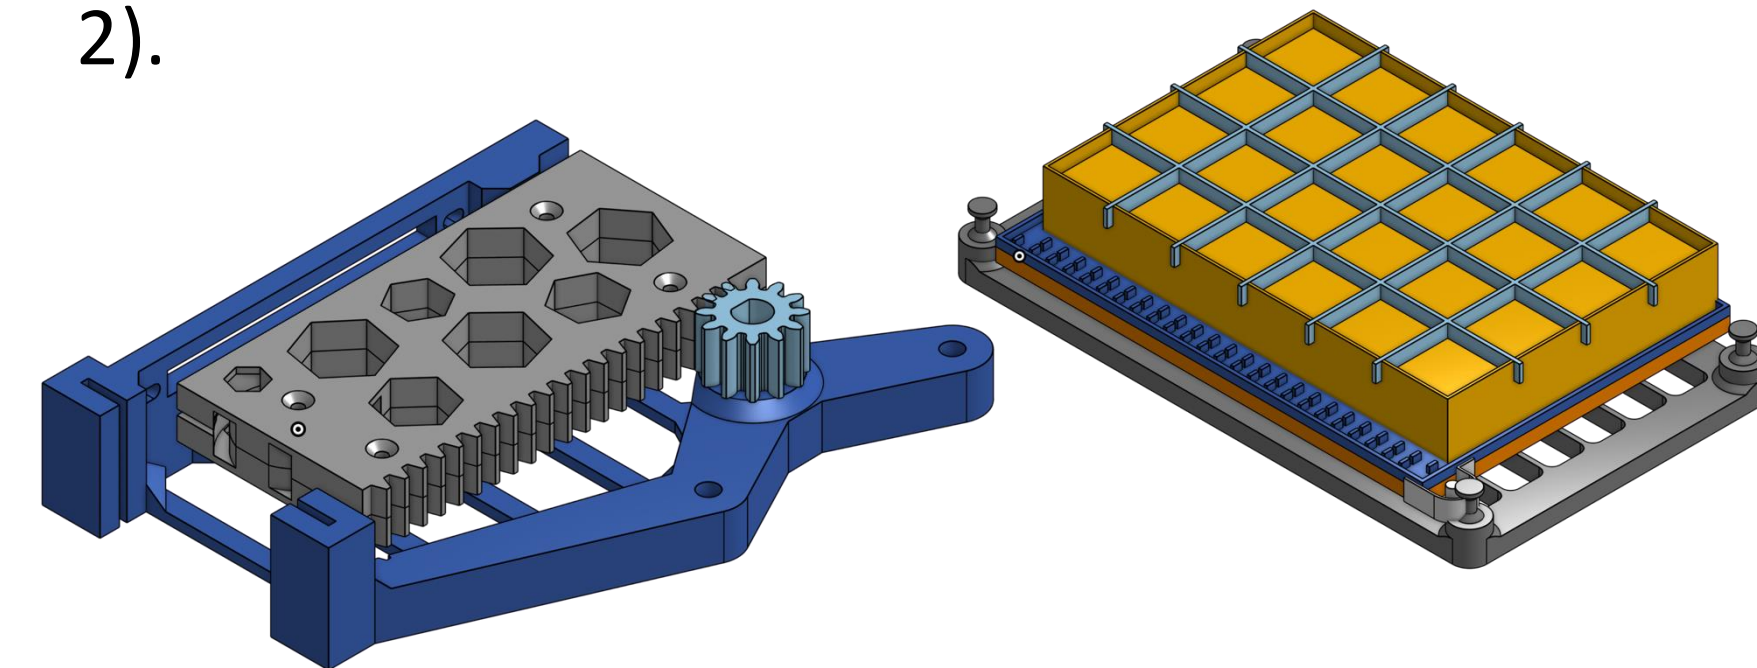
CAD models of pump driver mechanism and mold for cuboidal array soft robot.
